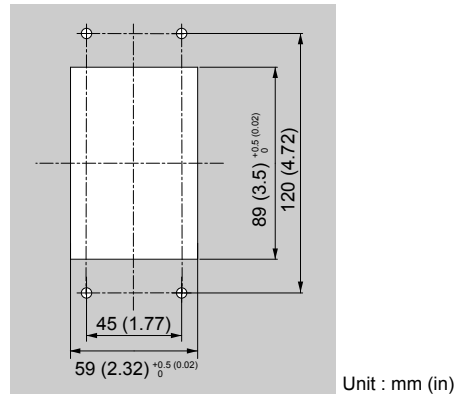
Panel Cut-Out Dimensions (Internal/Flush-Mount Installation)
